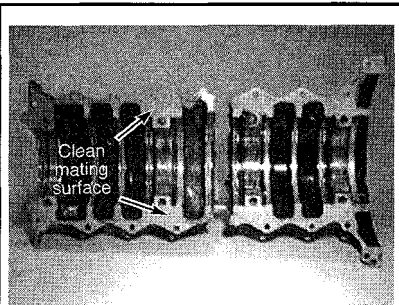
Gasket surfaces must be clean and free of all gasket material, sealant and nicks or scratches
